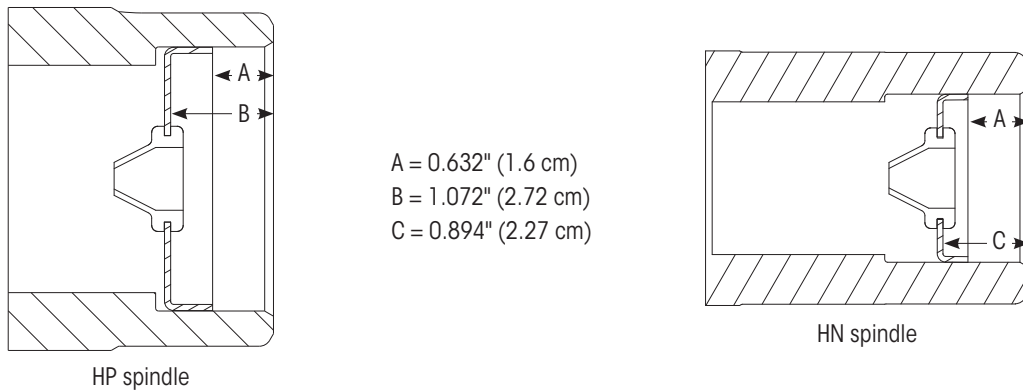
Recommended spindle plug depth (if not using plug tool shown in Figure 17)
